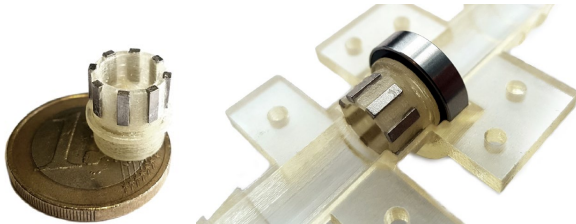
Additively manufactured turbine with attached magnets (left) and turbine with bearing inserted in one half housing (right).
